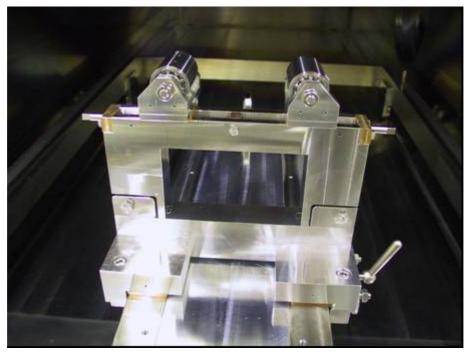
Front side of the new universal welding support
